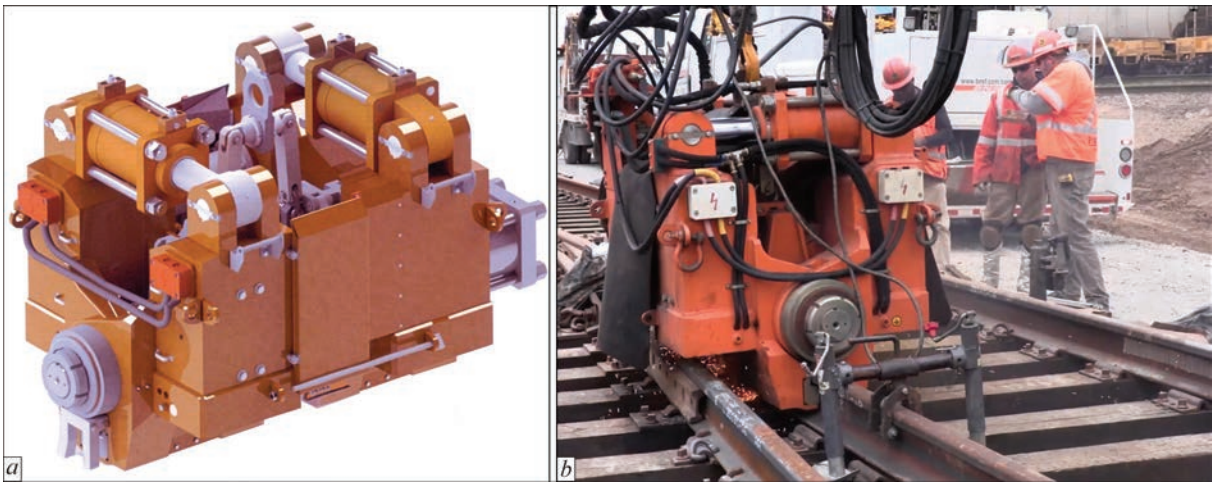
Prototype of machine K1045 (a) and welding complex with machine K1045 for FBW of rails in difficult-to-access locations (b)
